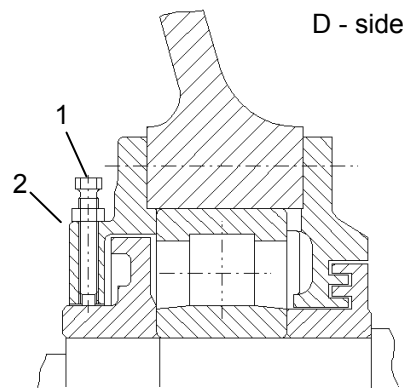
Transport locking device on D – side for cylindrical roller bearings
